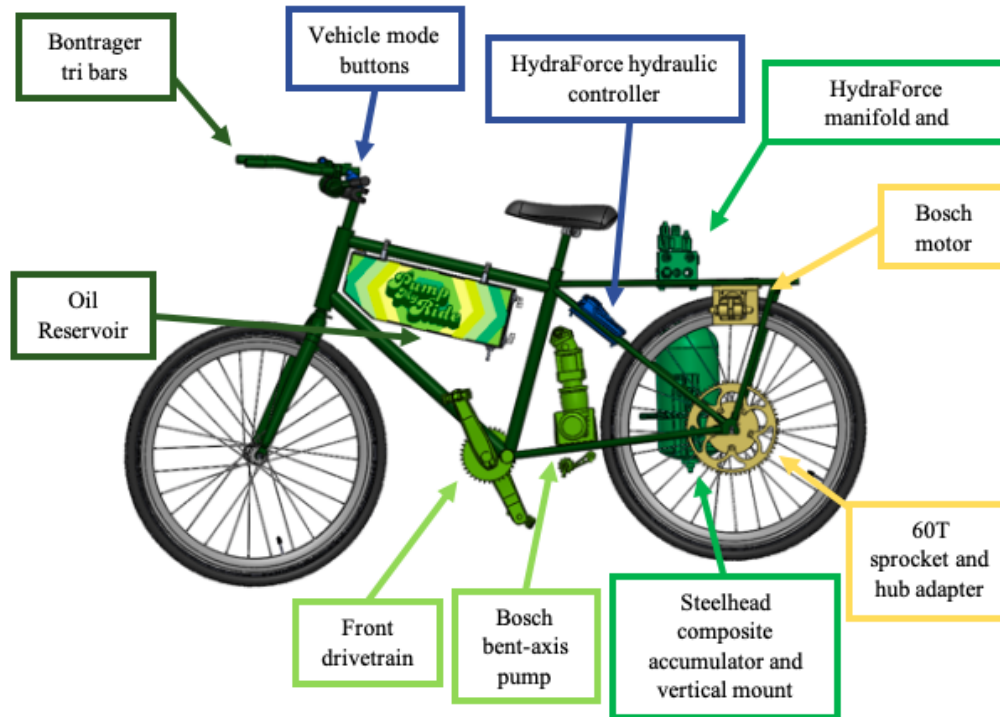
CAD of Final Vehicle Assembly and Component Layout
